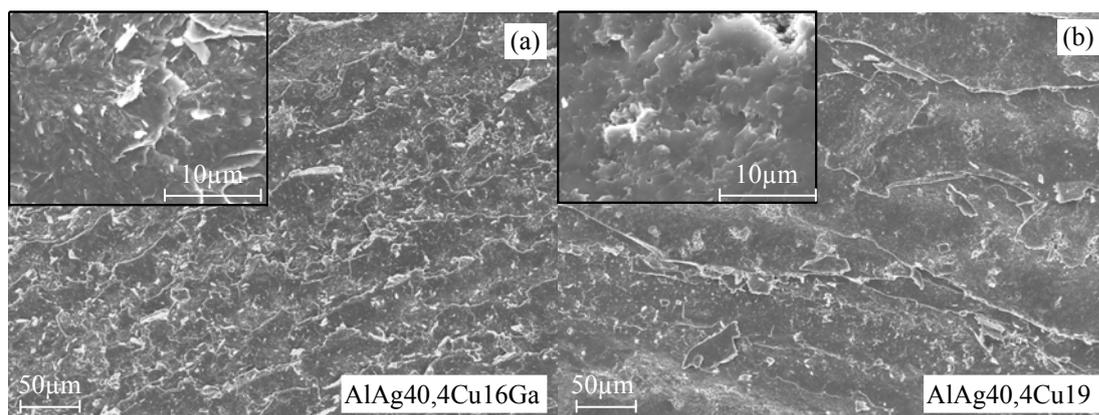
Fracture surfaces of the aluminum-steel-joints using Al-Ag-based filler metals
